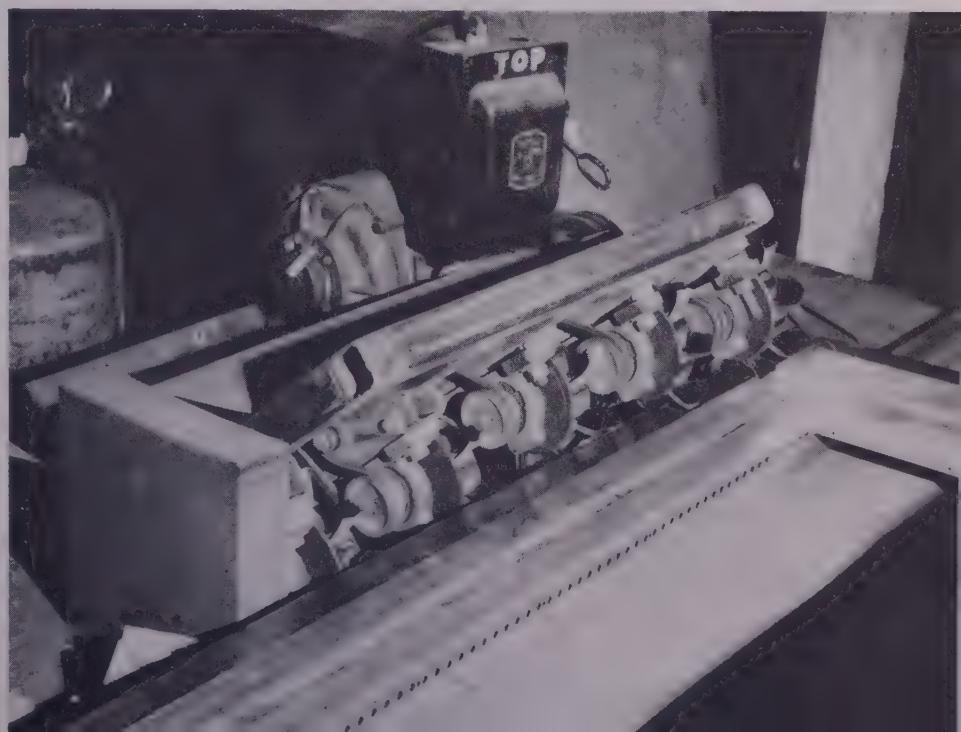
Ice cream and deep freeze cabinets are shown here being satin-finished with sanding wheels mounted on portable electric drills. Courtesy Webe Showcase & Fixture Co.
